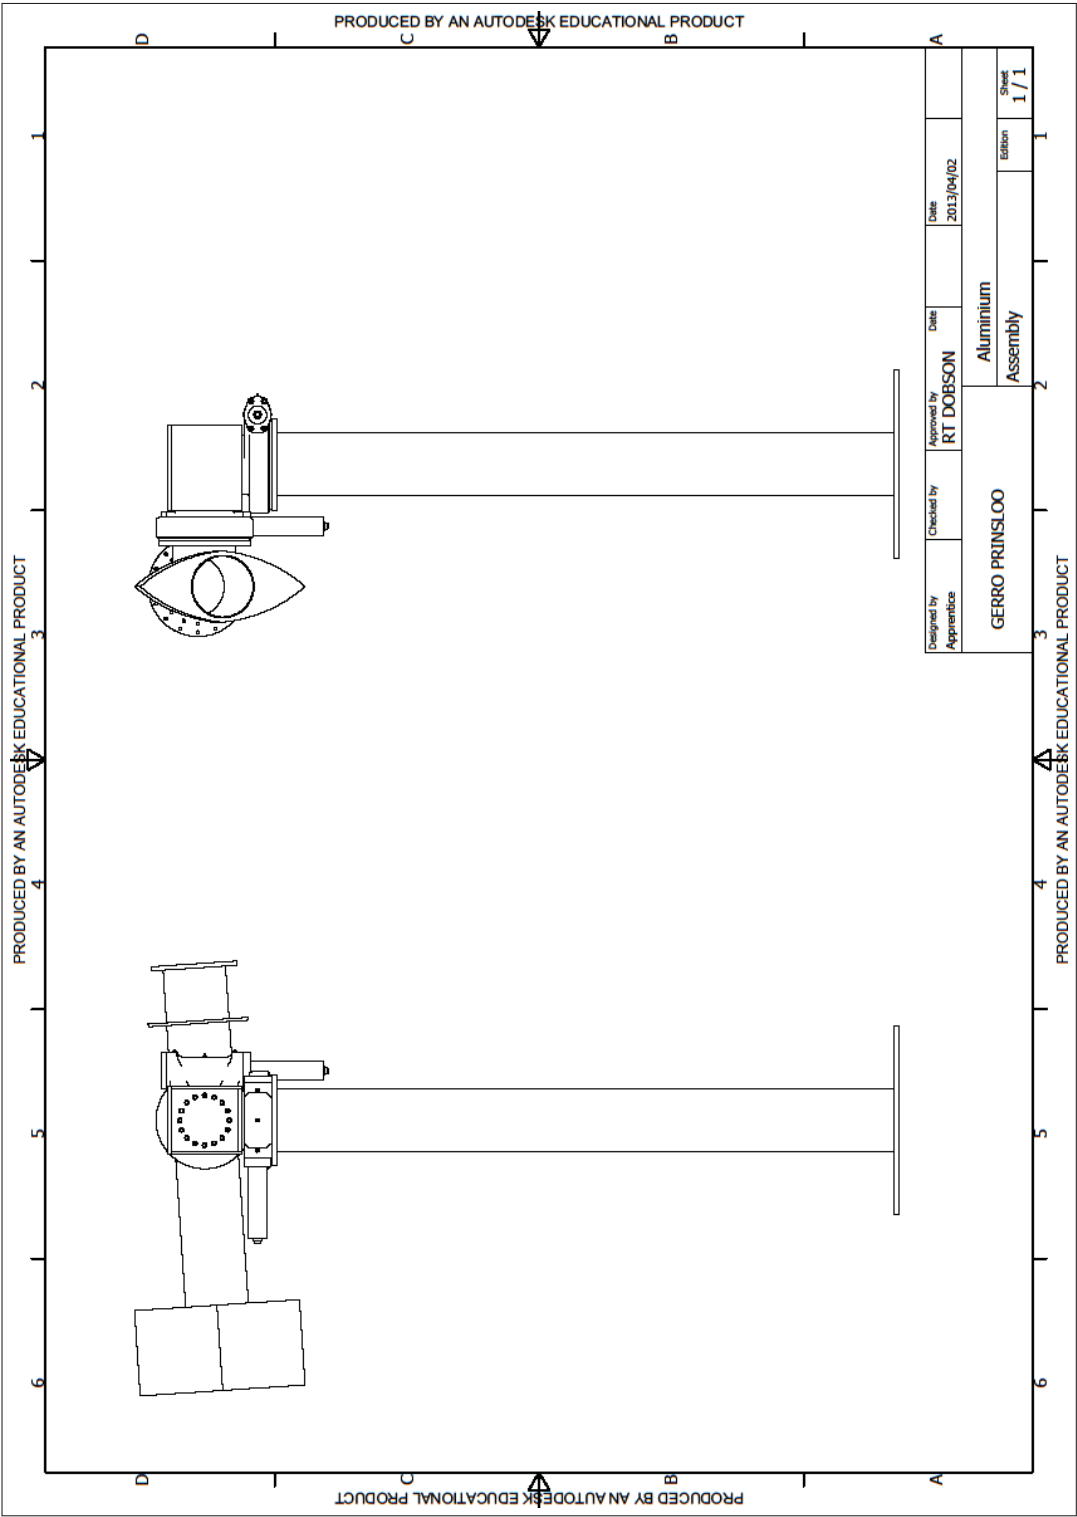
CAD drawing of the complete solar concentrator mechatronic platform system assembly.
